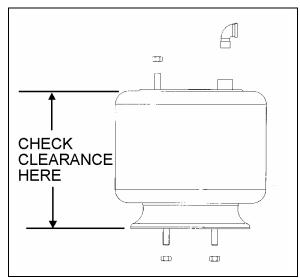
TYPICAL AIR SPRING CLEARANCE
